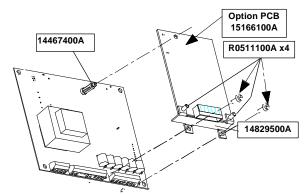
Mounting PROFIBUS Option PCB in Panel Mount Enclosure
